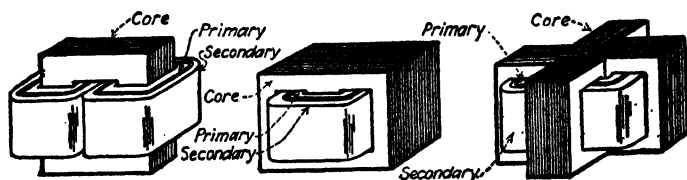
Types of Transformers. Left—core type; center—shell type; right—combined core and shell type.
